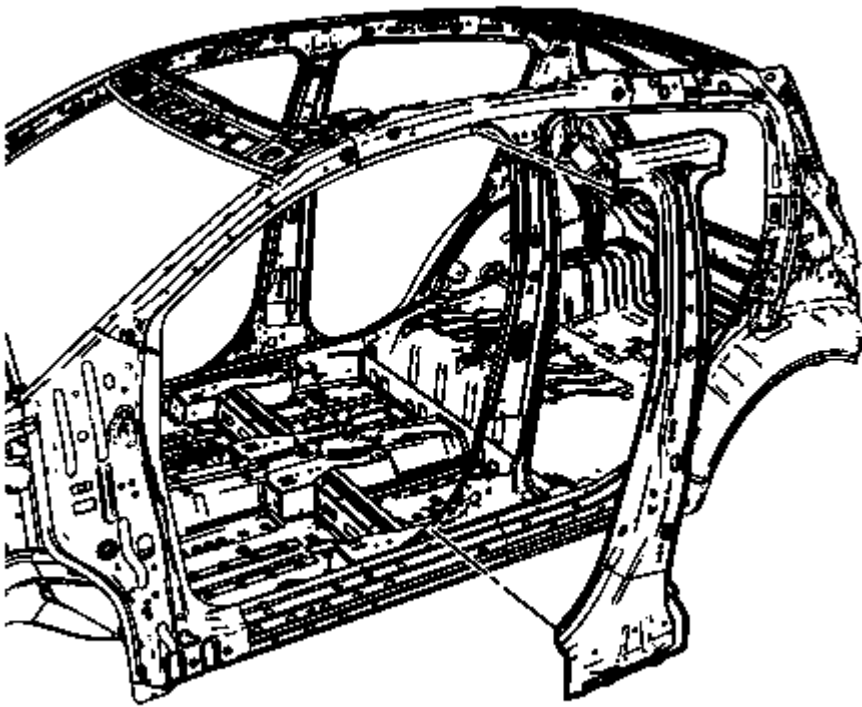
Removing Damaged Body Lock Pillar Outer Panel Reinforcement
